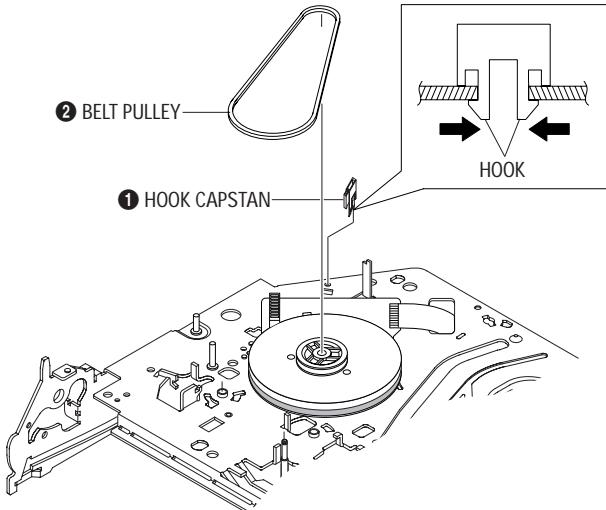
Hook Capstan, Belt Pulley Removal
